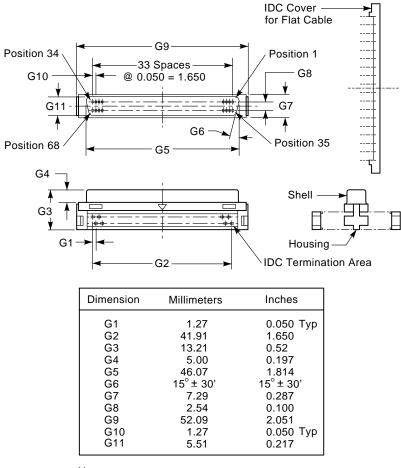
through Figure 1–10 illustrate the 68-position cable connector assembly. The 68-pin connector is a micro D, female, IDC type for flat cable, with metal shell.
